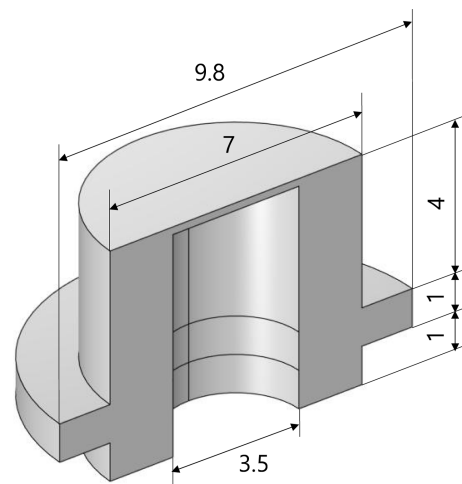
Dimensions of metal hydraulic part manufactured by machining of SUS631.
